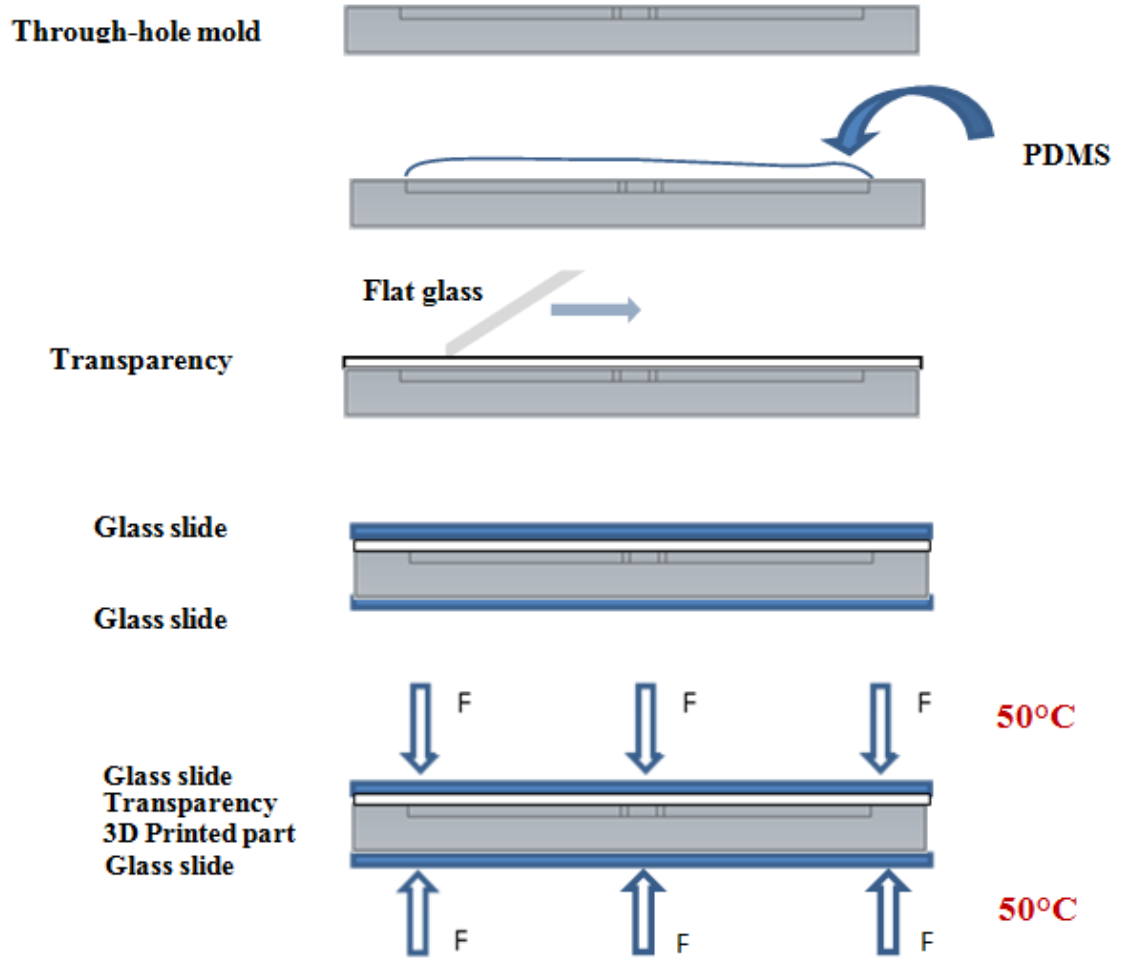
Standard procedure of making through-hole PDMS by using a 3D printed part
